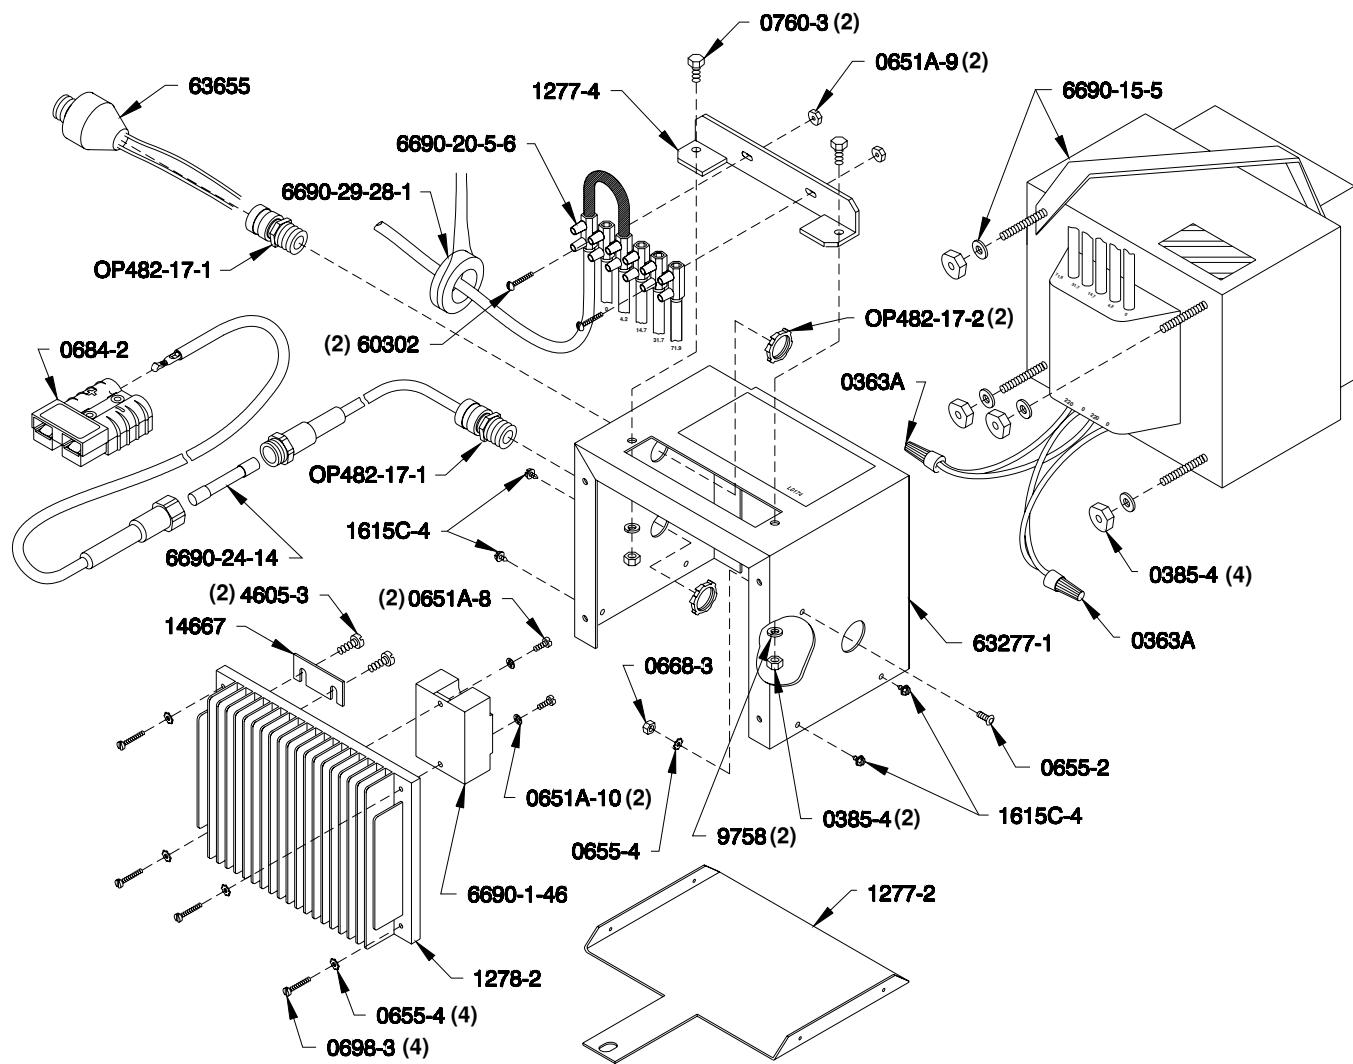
70V Auto Power Pack (Part No 63277), Exploded View
